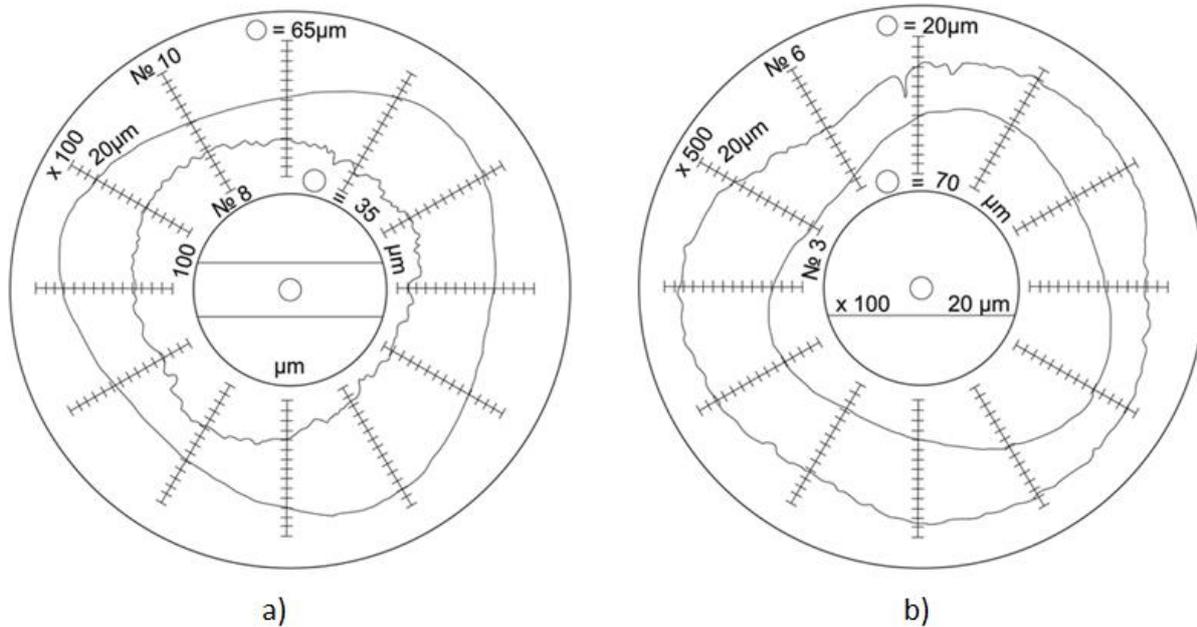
Circlograms obtained by machining holes with prefabricated drill bits.
